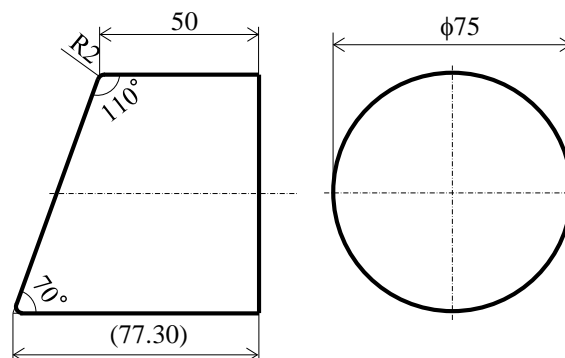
Mandrel for cylindrical cup with oblique bottom.
